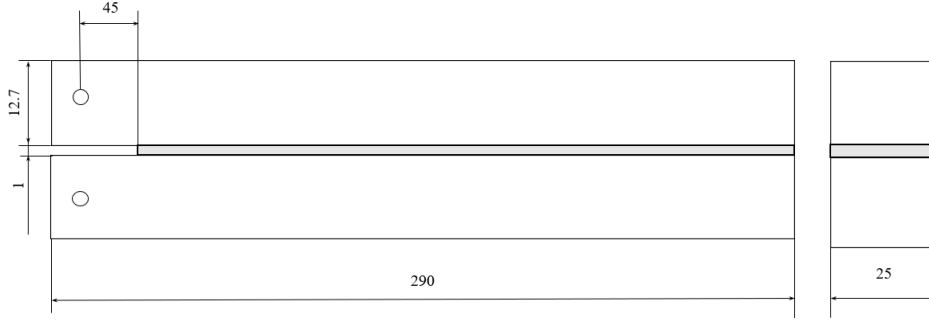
Schematic representation of the DCB geometry, dimensions in mm.
